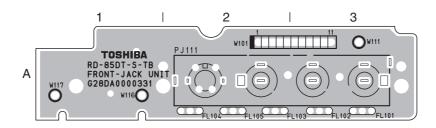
EU03C Front Jack PC Board (Top side)
